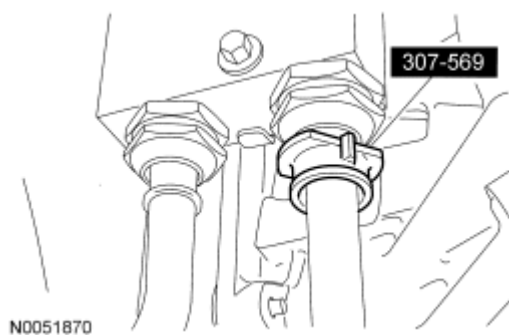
Disconnecting Transmission Cooling Tubes Using Special Tool (307-569)
